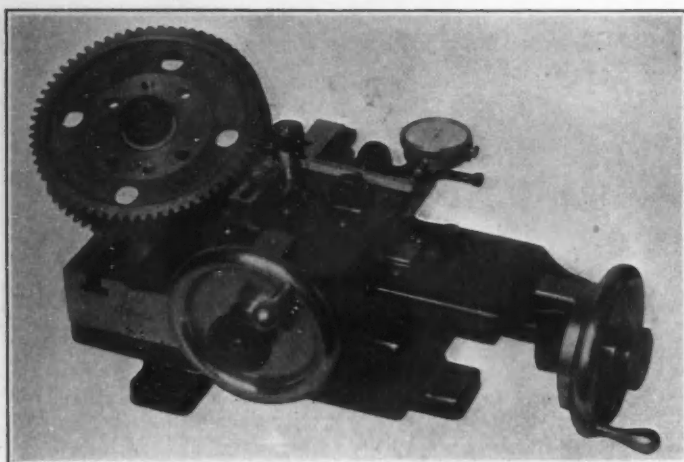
THE GEAR-TESTING DEVICE EQUIPPED WITH SPECIAL ADAPTER FOR CHECKING THE TOOTH CONTOUR AND SPACING OF HELICAL GEARS
